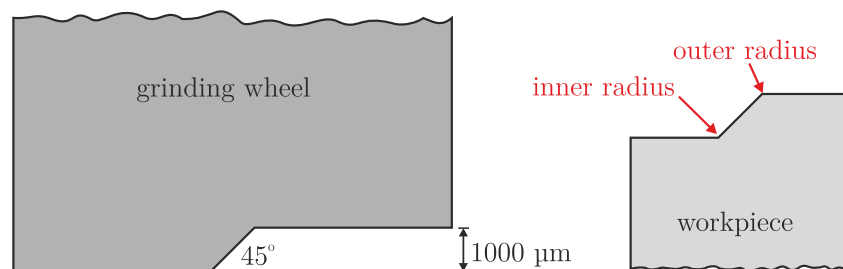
Grinding wheel and ground workpiece profiles indicating the location where inner and outer radius were measured on the workpiece
